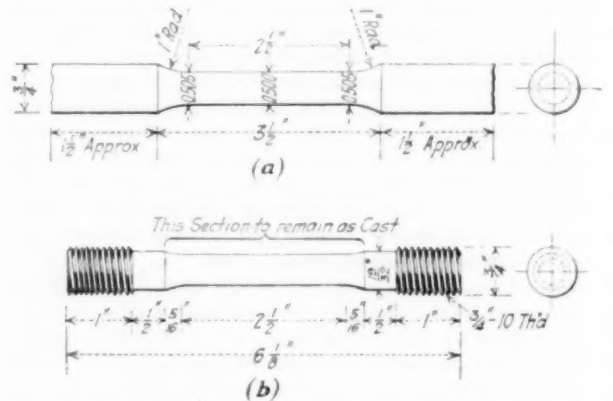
DIMENSIONS OF SPECIMENS AS CAST (a) AND AS MACHINED (b)
